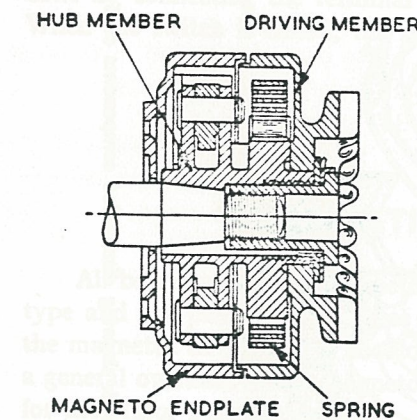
Sectional view of Type Z1-1 Impulse-Starter.
